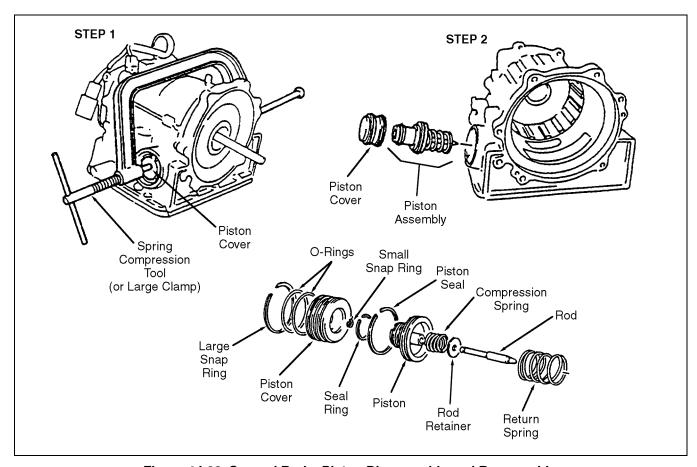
J-22. Second Brake Piston Disassembly and Reassembly
